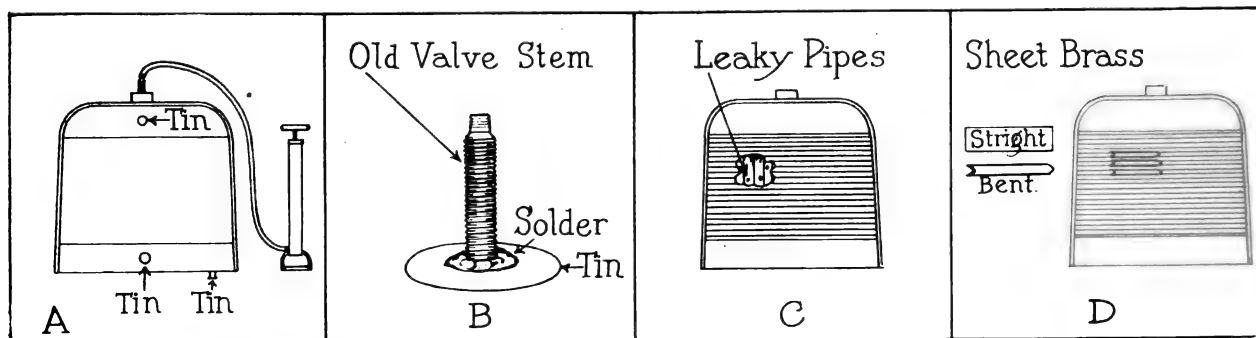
A, the Vents of the Radiator Closed for an Air Pressure Test; B, Tire Tube Valve Used to Secure Air Pressure; C, Metal of Radiator Cut Away to Repair Leak; D, Strips of Metal Soldered on to Complete Job.
